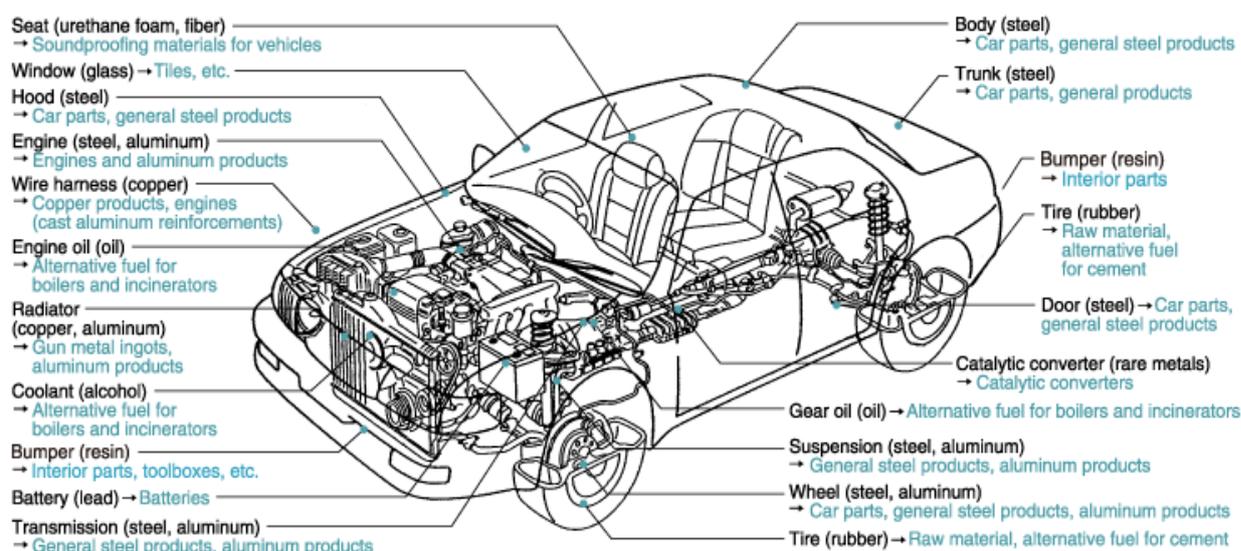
A view of automobile parts and recyclable materials (Toyota)
